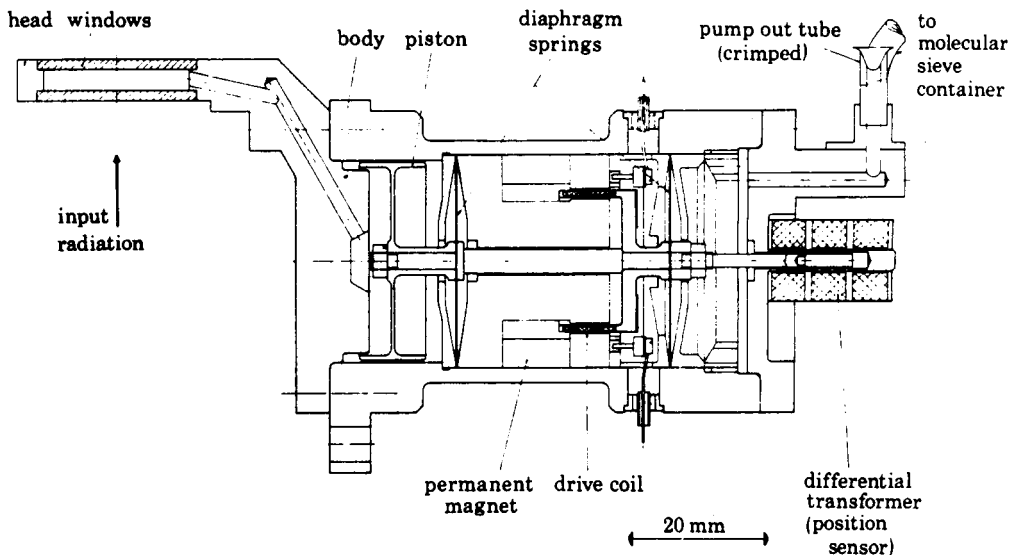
Cross section of a p.m.r. assembly. The body of the PMR is made of titanium with gold 'O' ring seals at each end. The support springs and coil lead-outs are made of beryllium-copper. The thermostatted container of molecular sieve is not shown.
